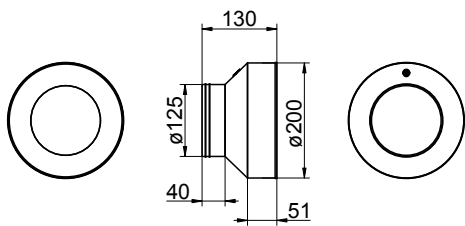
Dimensional drawing of DN125 adapter (dimensions in mm)
